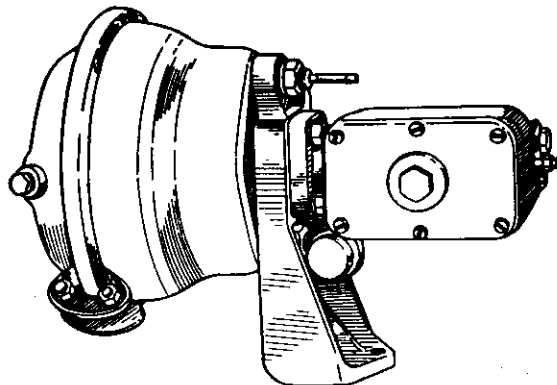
AIR/HYDRAULIC ACTUATOR SHOWING
